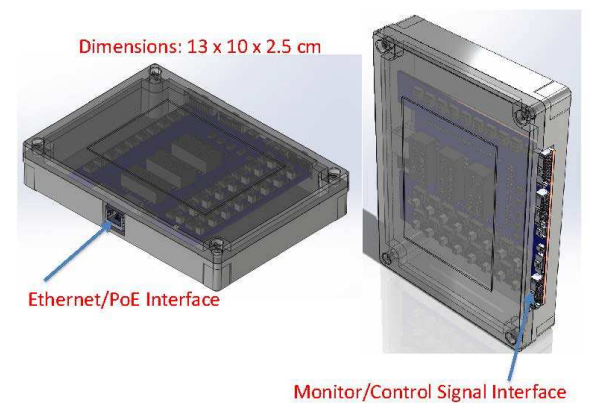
3D CAD model rendering of the VDAQ module identifying its physical interfaces.
